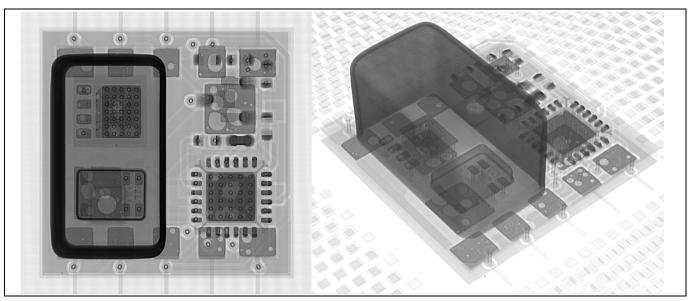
Top-view (left) and angular (right) x-ray image of a soldered MLGA module. The module-tobase board solder joints as well as the internal setup of the module assembly are visible.
